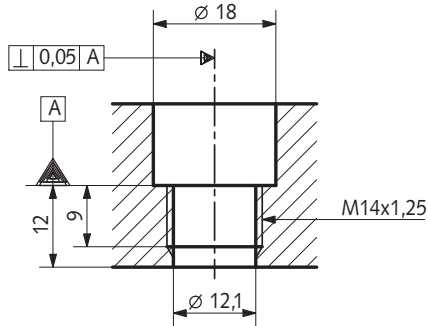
Fitted into combustion chamber with hole ø18 mm, seal Type 1111A, diaphragm flush mounted with the combustion chamber
